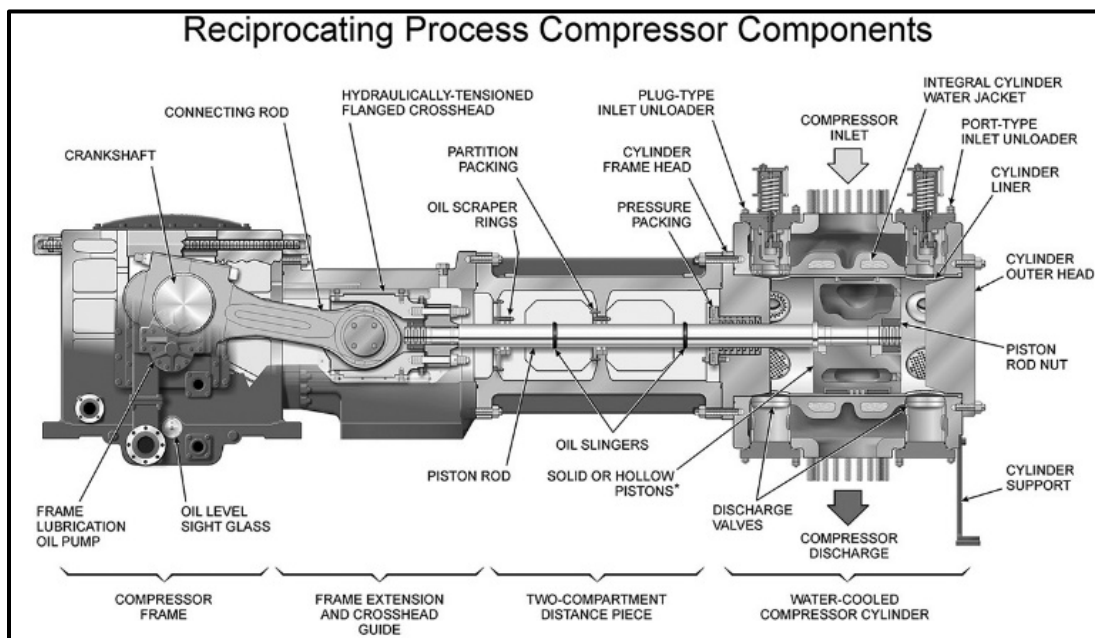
Reciprocating Compressor, Internal View (Courtesy of Piping Engineering)
